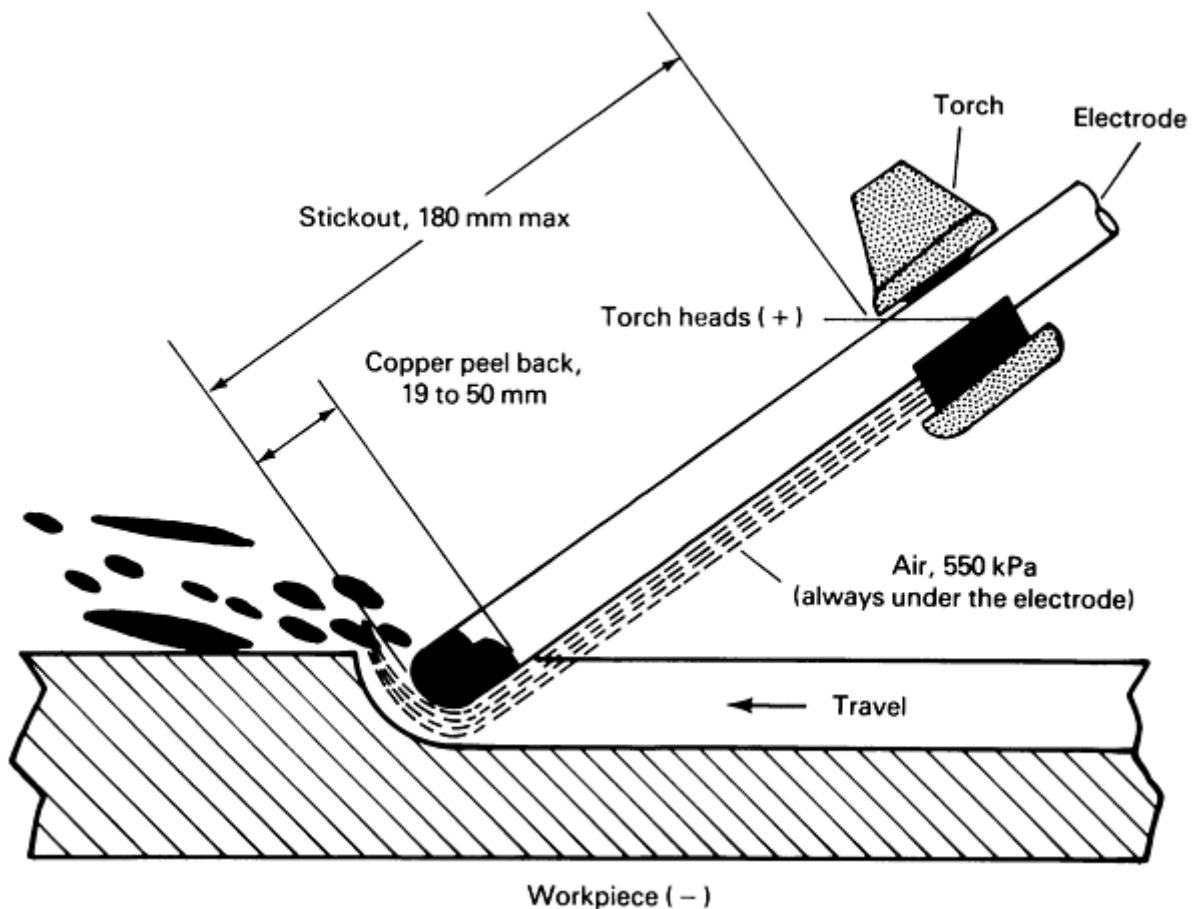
PRINCIPLES OF CAC-A CUTTING
